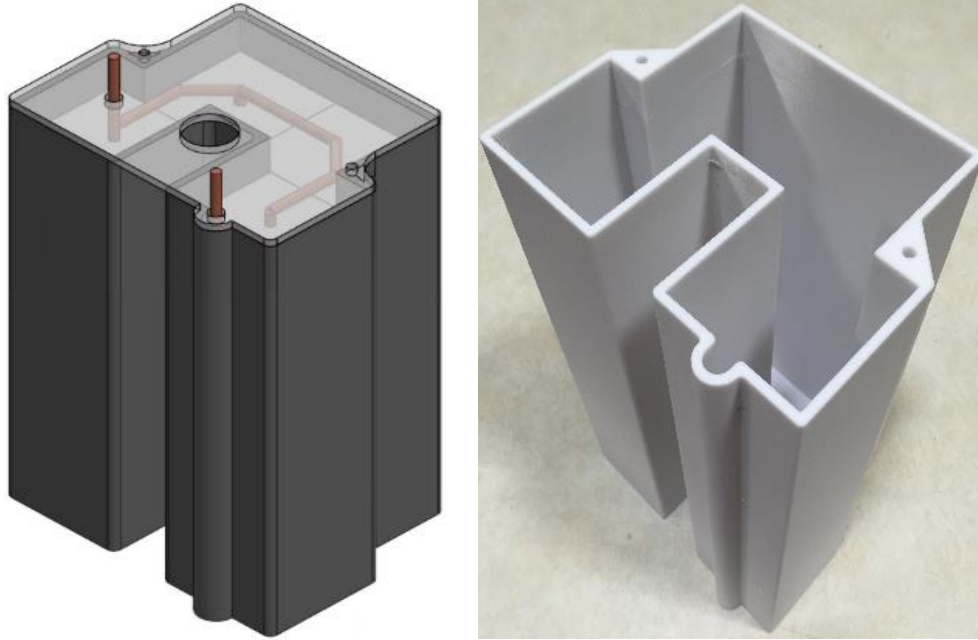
PCHX housing model (left); 3D printed container (right).
